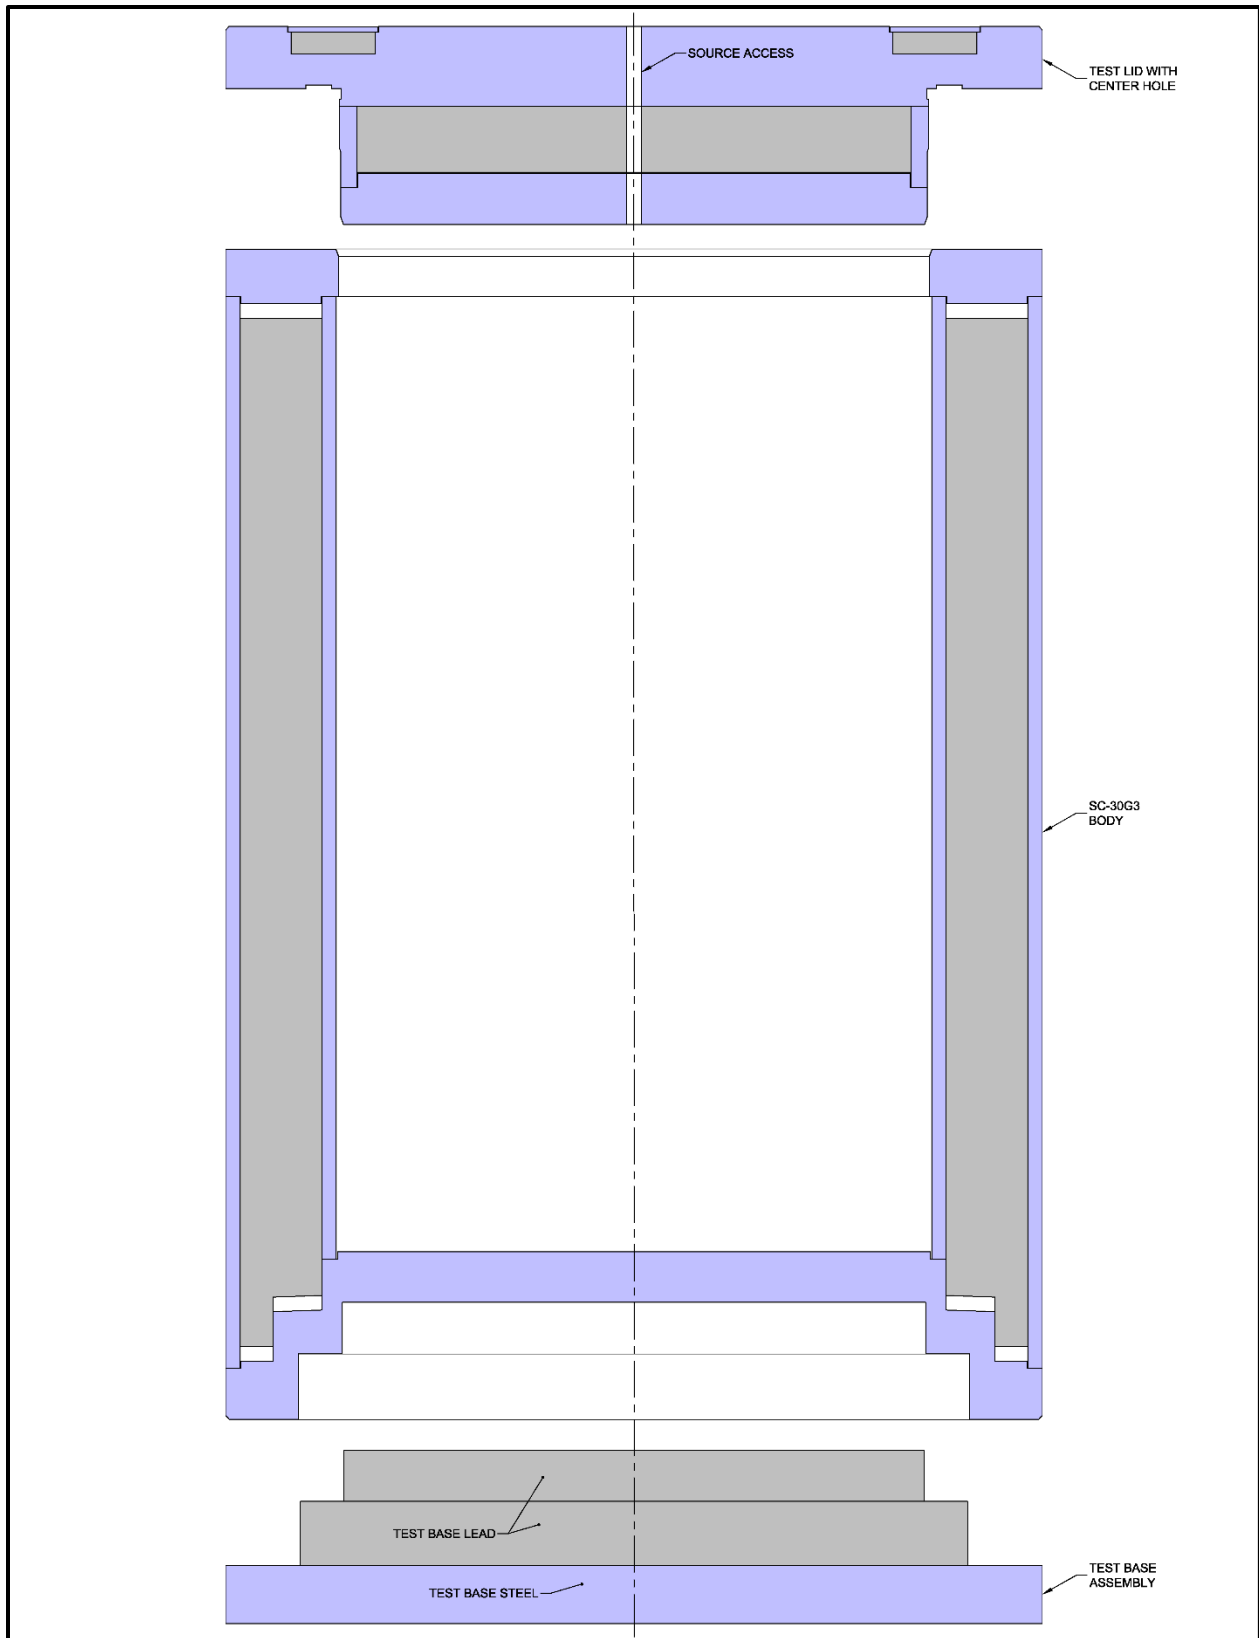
SC-30G3 Gamma Scan Test Assembly Exploded View
